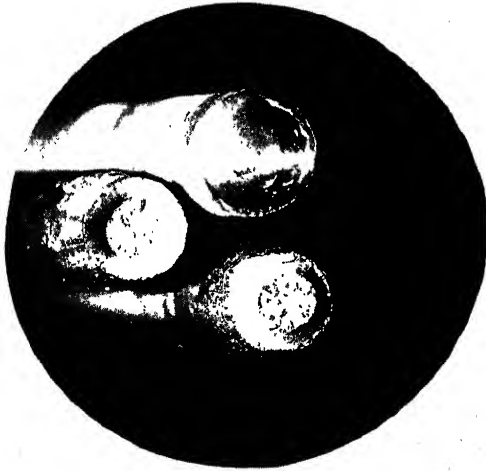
Top: torsion fracture. Bottom: cup and cone fracture.
